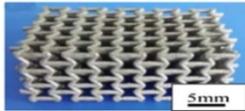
An investment casting and 3D printed aluminum re-entrant auxetic structure [82]
